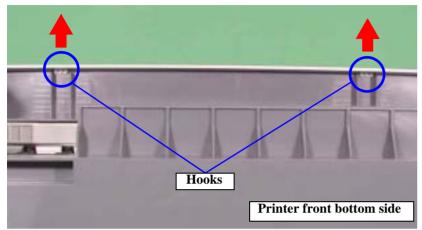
Hooks That Secure the Bottom Front of the Upper Housing
